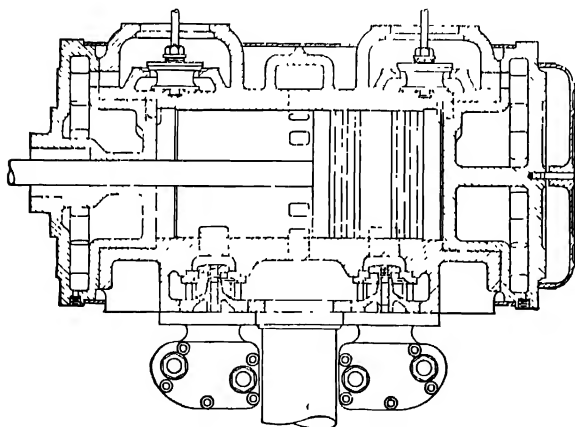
Section through Cylinder of a 'Universal' Uniflow Engine.
